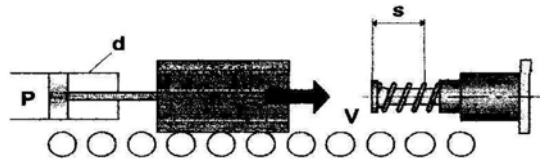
A scheme of a traditional design of a pneumatically driven linear module
